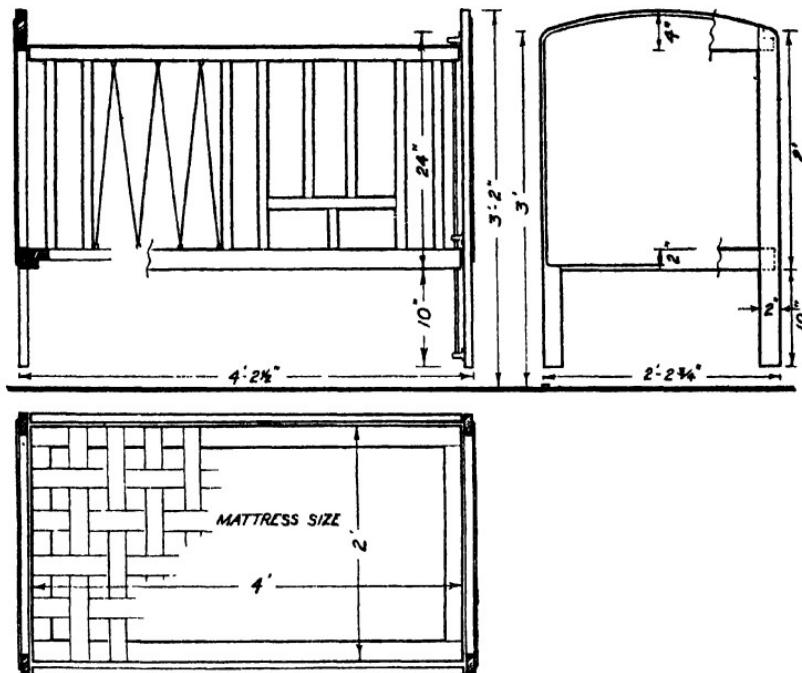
ELEVATIONS AND PLAN WITH MAIN SIZES.
